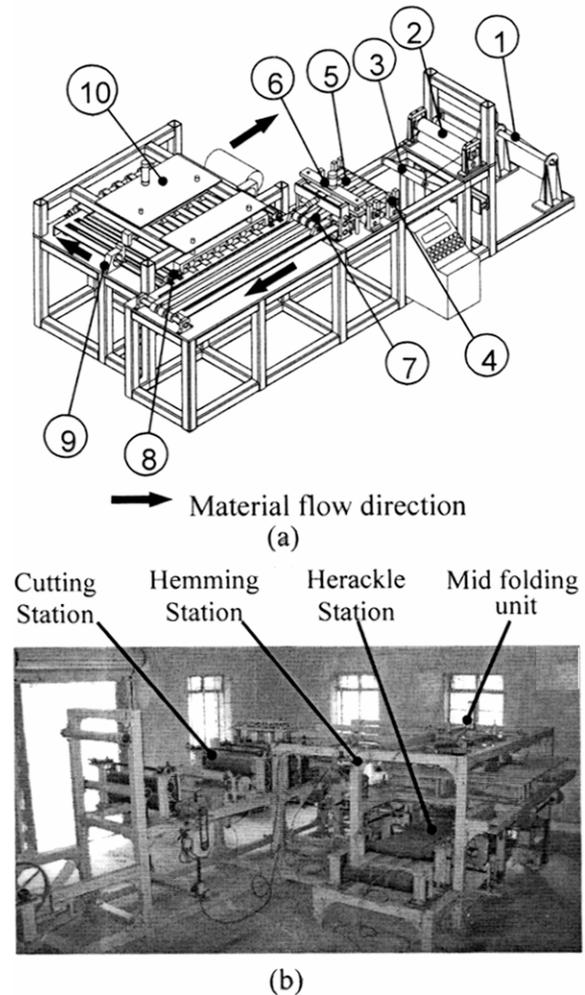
(a) Schematic view and (b) perspective view of automatic jute bag making machine [1-mandrel, 2-feed roller assembly, 3-guide roller assembly, 4-dancing roller assembly, 5-conveyor assembly I, 6-shearing assembly, 7-gripper assembly I, 8-gripper assembly II, 9-stitching machines and 10-mid-folding unit]
